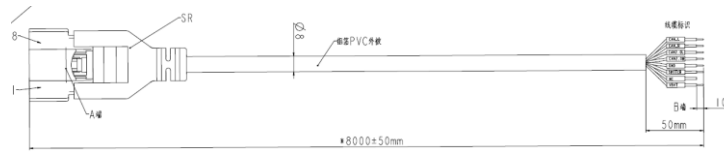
One connecting cable (8 m, 8 pin or 6 pin)
